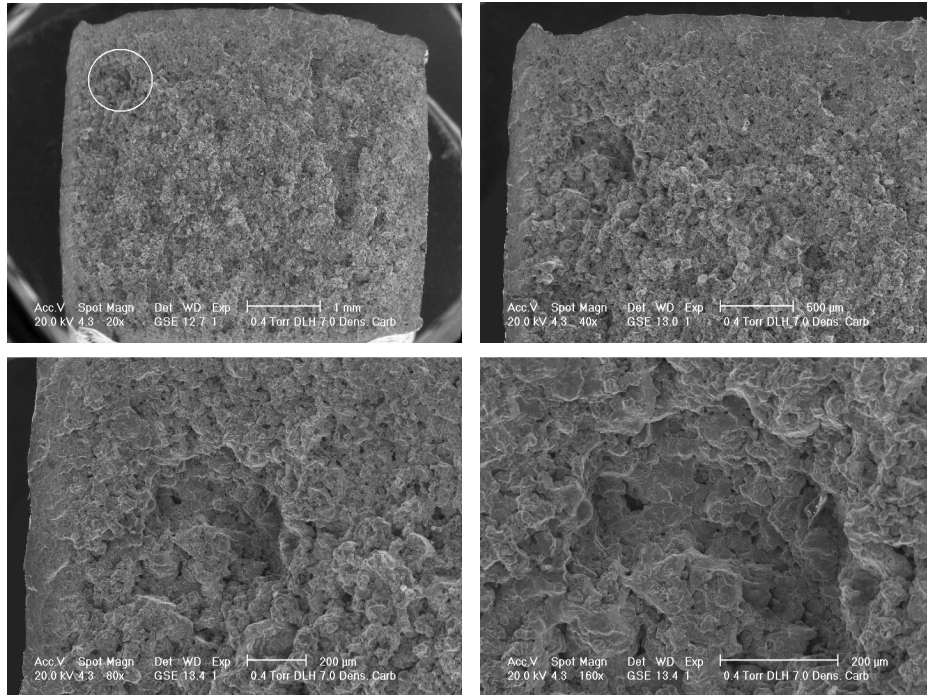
fracture surface of carburized  $7.0\text{g}/\text{cm}^3$  surface densified 0.2% C DLH
